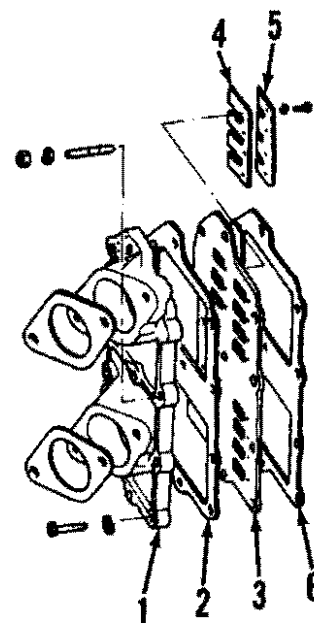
Exploded view of intake manifold and reed valve assembly.
